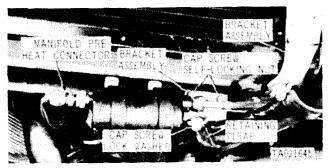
Removing or installing wiring harness and generator cable bracket assembly.
